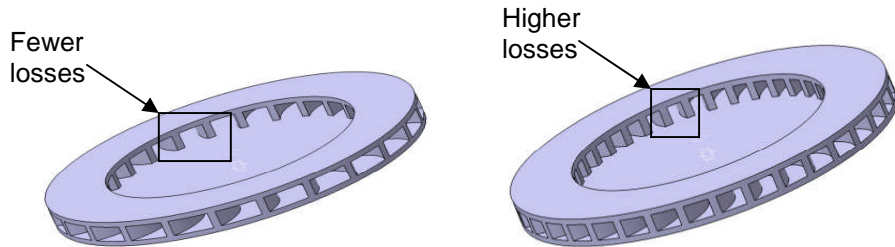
Schematic of a 36 and 48 bladed rotor
